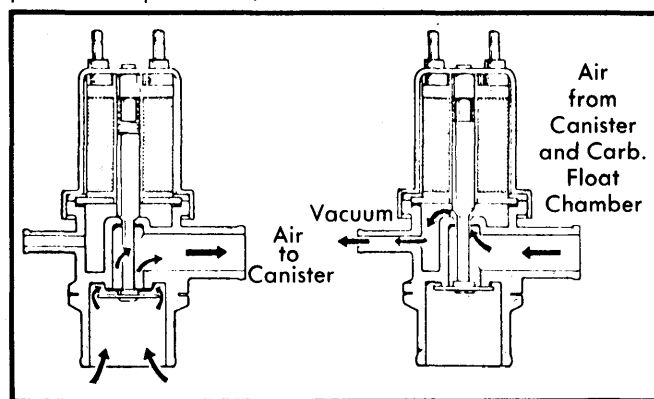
Anti-Run On Control Valve (Carbureted Models)
